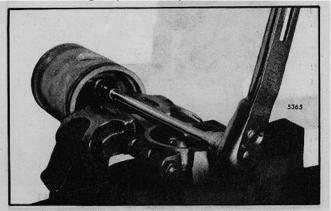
Tightening Connecting Rod to Piston Pin Bolts
